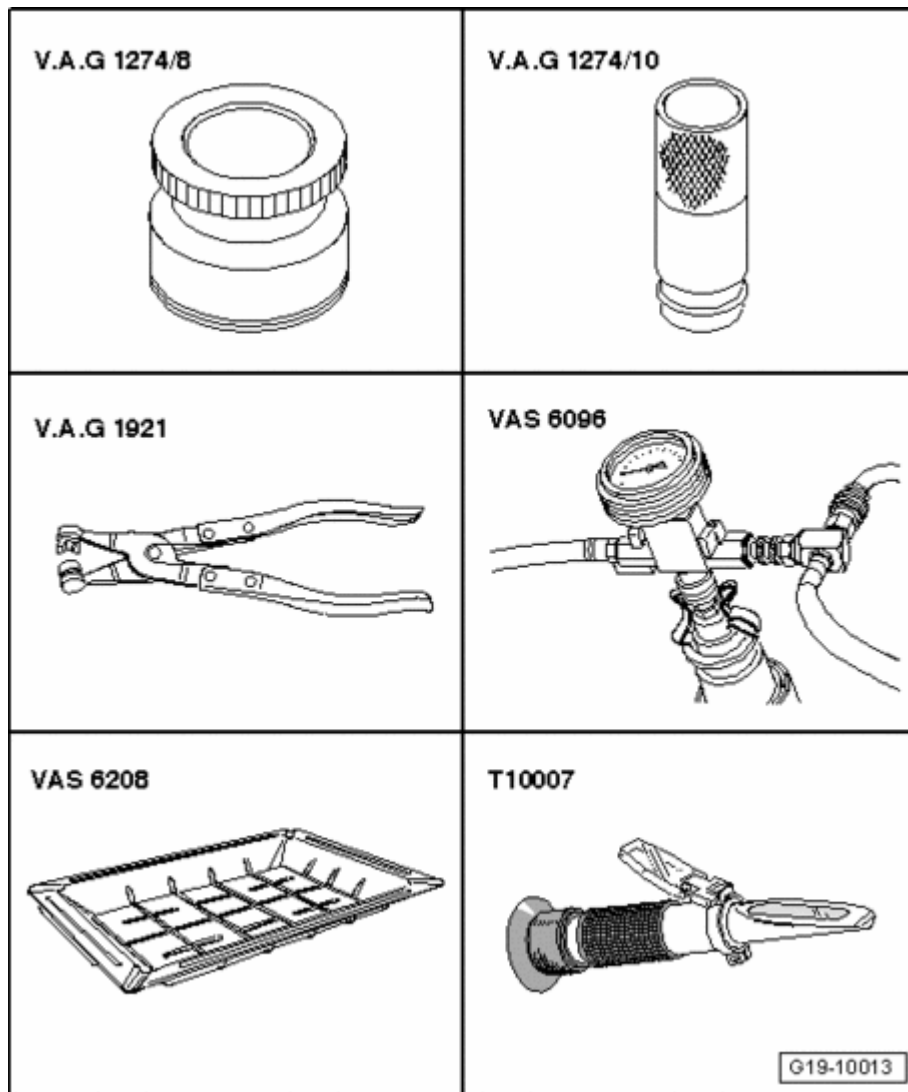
Identifying Special Tools - Cooling System, Draining And Filling
